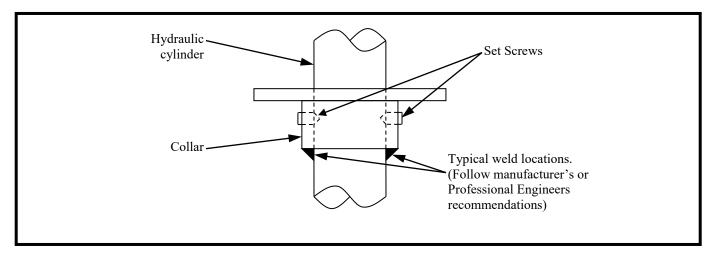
Typical Collar and Hydraulic cylinder Connection
